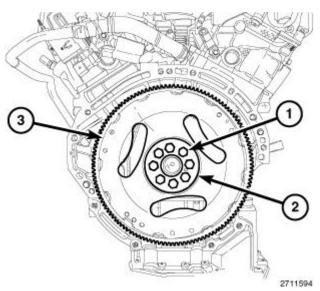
Flexplate, Spacer Plate & Bolts Courtesy of CHRYSLER GROUP, LLC
